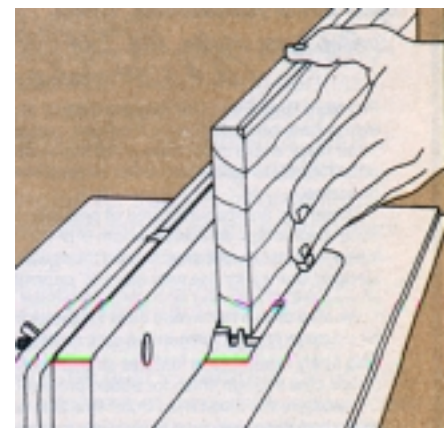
Cutting a glue joint with a molder. (You can also use a shaper.)
